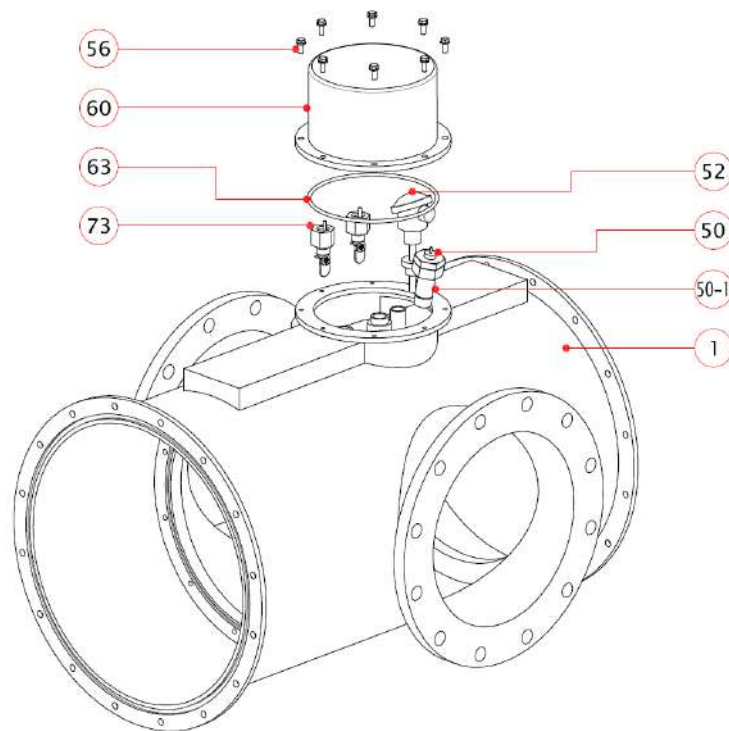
Disassembly of UV Unit Element (Chamber End Plate)
